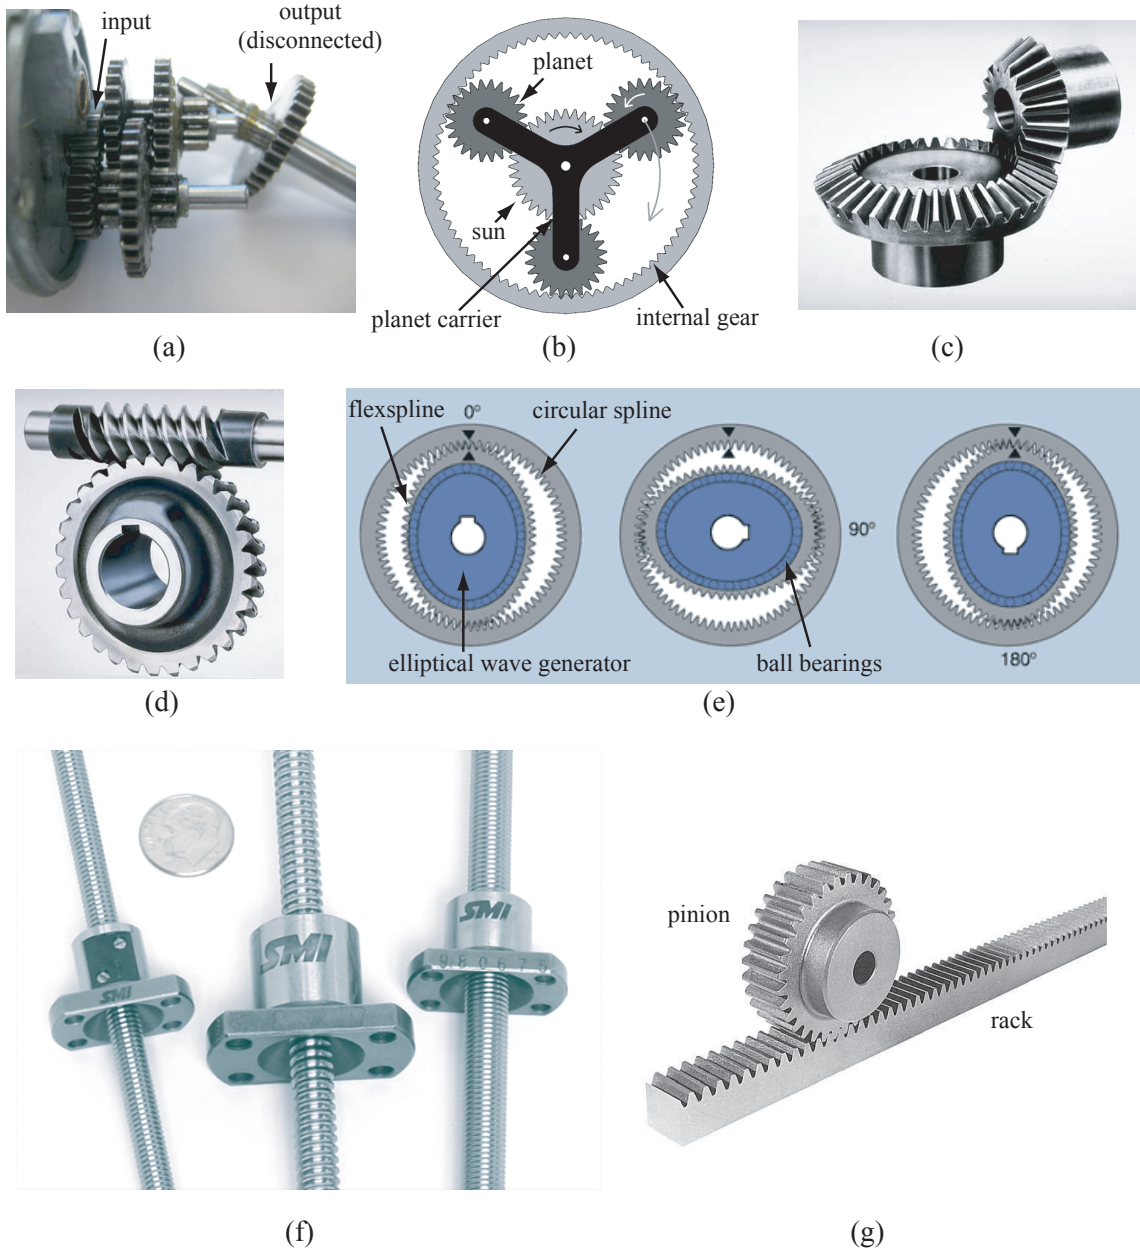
(a) Multi-stage spur gearhead. (b) A planetary gearhead. (c) Bevel gears. (d) Worm gears. (e) Harmonic drive gearhead. (f) Ball screws. (g) Rack and pinion.
